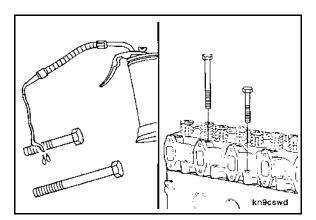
LUBRICATE THE REMAINING CYLINDER HEAD CAPSCREWS AND UNDER THE CAPSCREW HEADS
